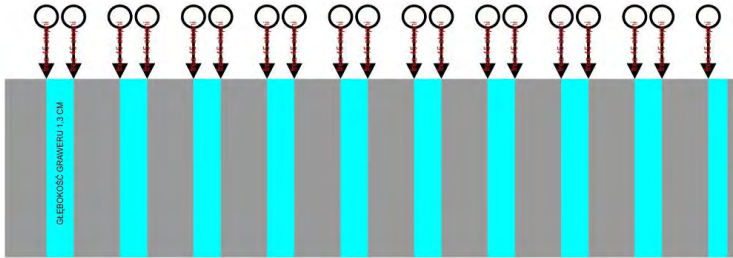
2D CorelDraw file with instructions to a CNC milling machine [8] how to create “Larsen” precast by a subtractive digital fabrication process. *Source:* [Marcin Giedrowicz]
